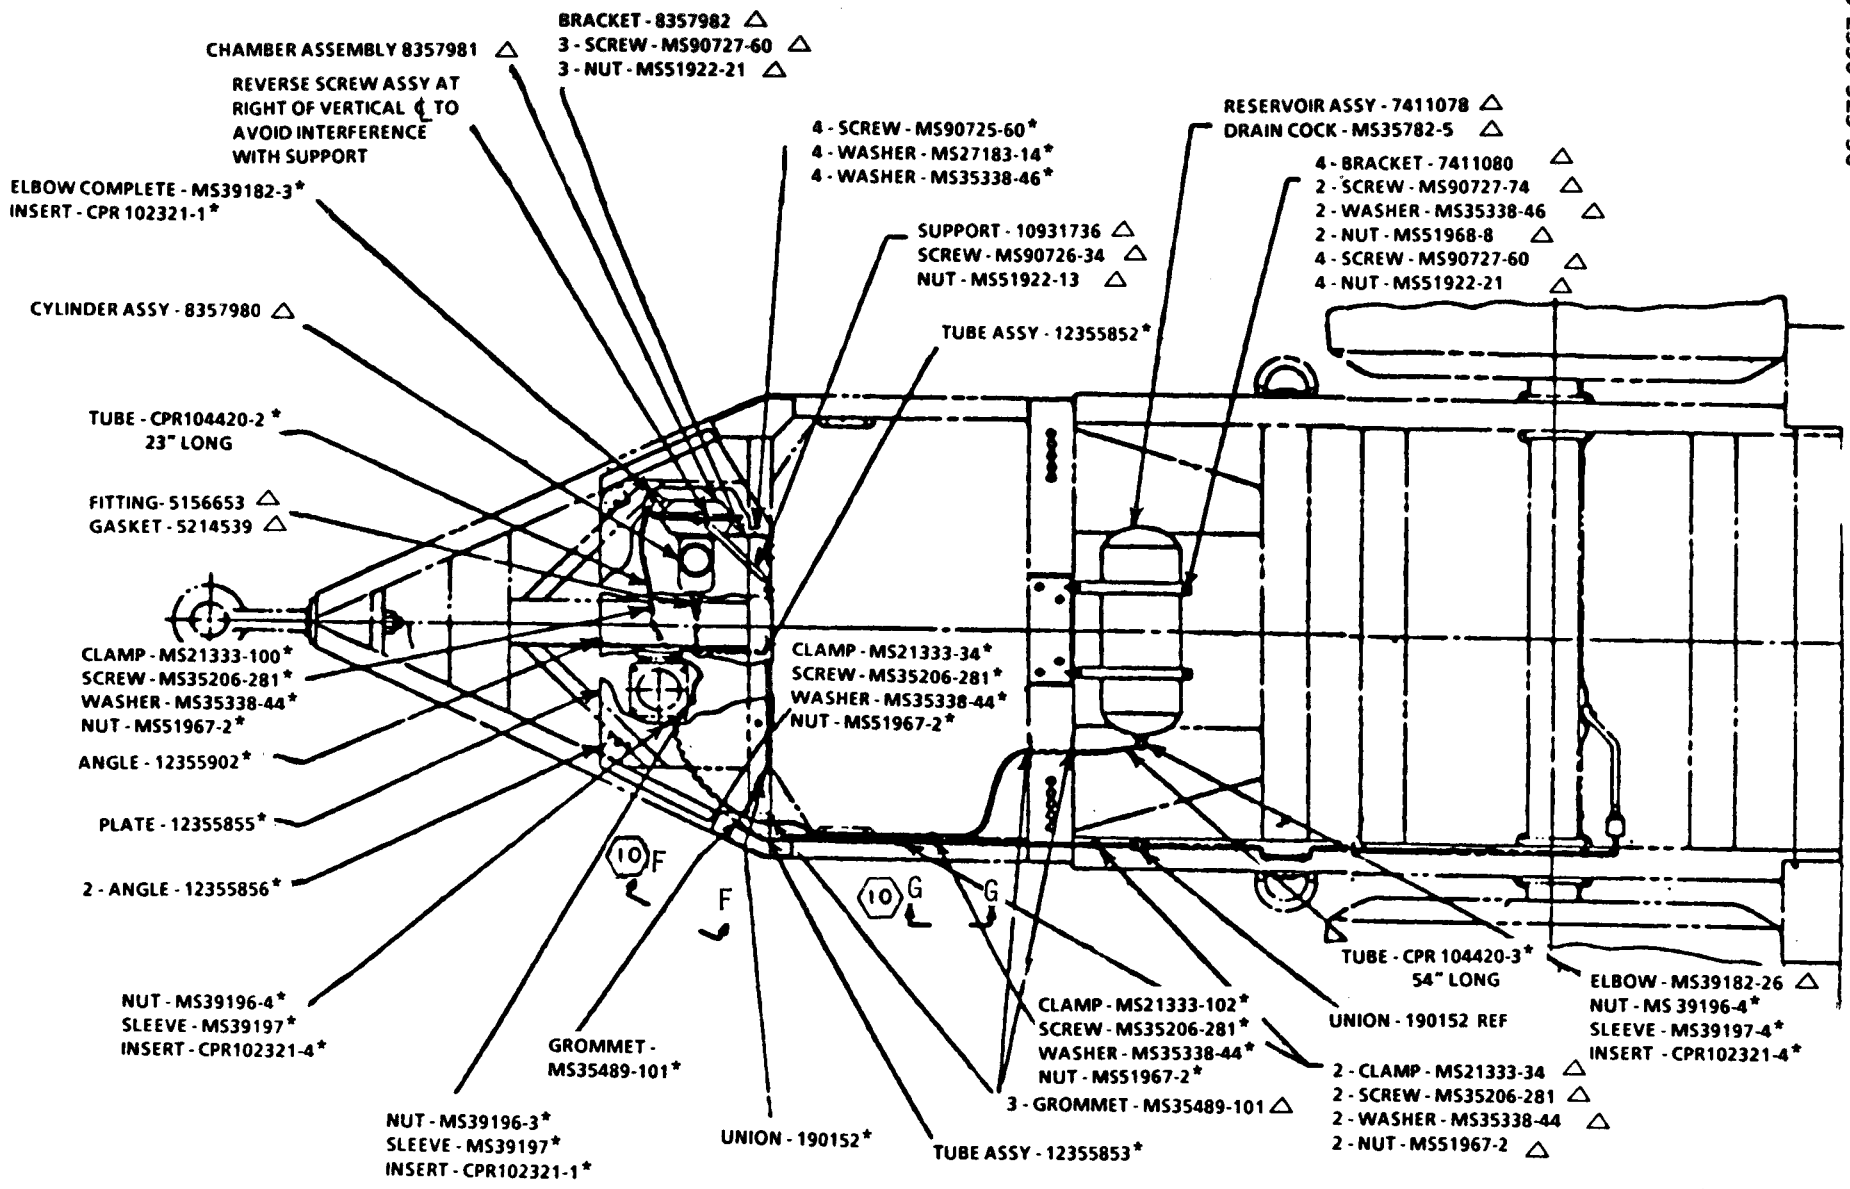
Chamber assembly, cylinder assembly, reservoir assembly, and tube assembly.
